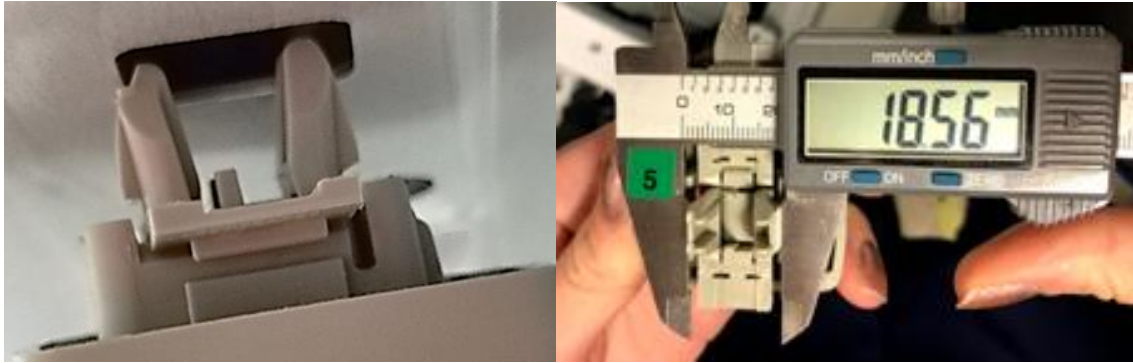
Picture showing an example of one defect support bearing with press marks on the lock pins. This support bearing has already been expanded and is therefore far wider than the average, and there is still a lot of space for it to enter the hole in the car body.
